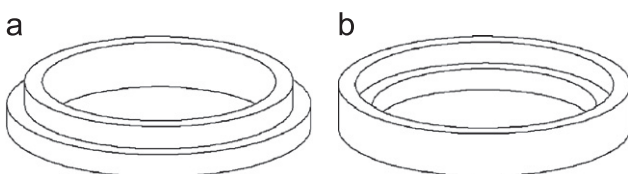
Schematic drawings of seal plates with pressure dam: (a) inner seal dam and (b) outer seal dam.
